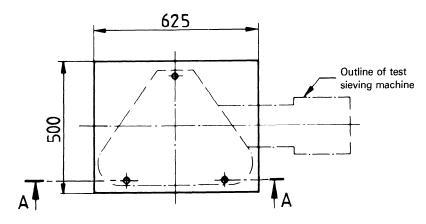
Base-plate and mating dimensions for the assembly of test-sieving machines, type A
